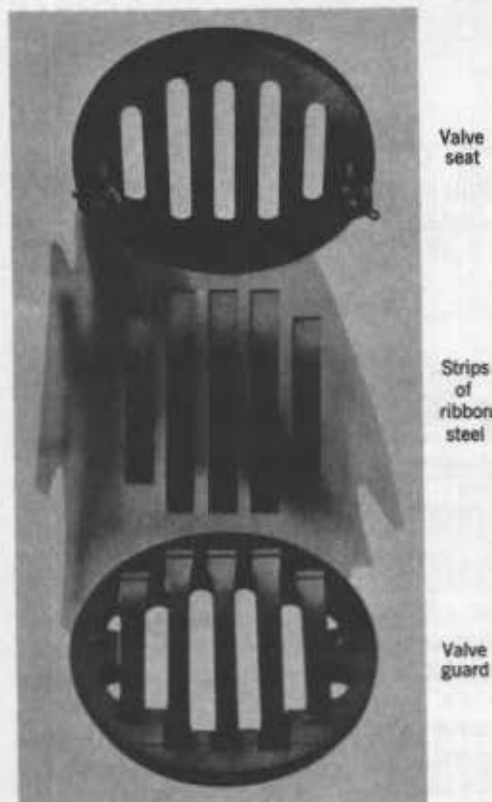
One popular design of flexing valve. (Courtesy Worthington Corporation.)
